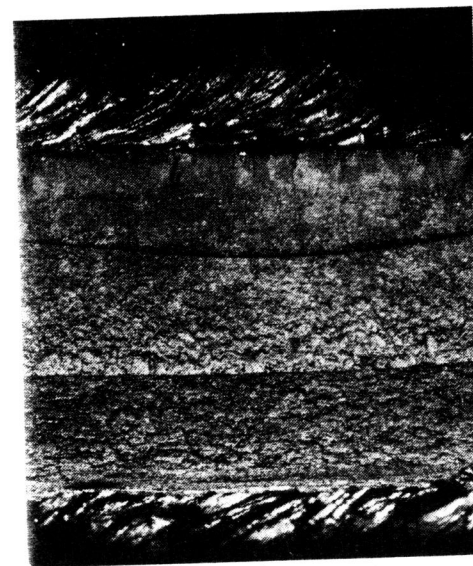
Fracture surface of one fatigue specimen showing shallow crack propagating from the weld toe (Magnification 5X)
